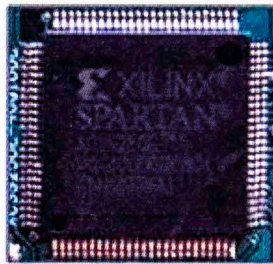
Hand-soldered 100-pin FPGA Package on a Prototype Printed Circuit Board
